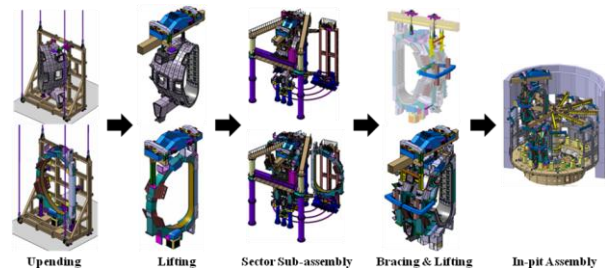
Assembly sequence of the VV/TFC/VVTS 40° sectors and overall configuration of the sector sub-assembly and sector assembly tools.
